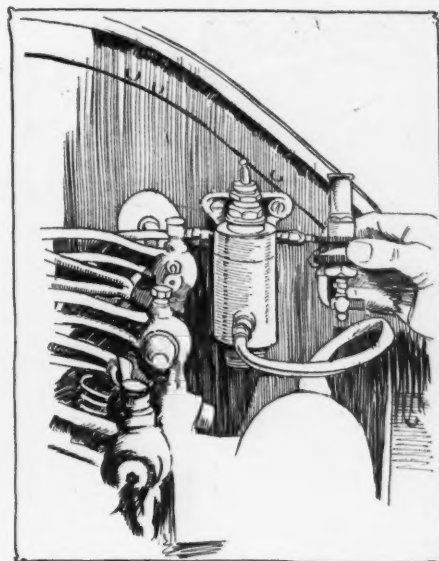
WILLIAMS EXHAUST REGULATOR
